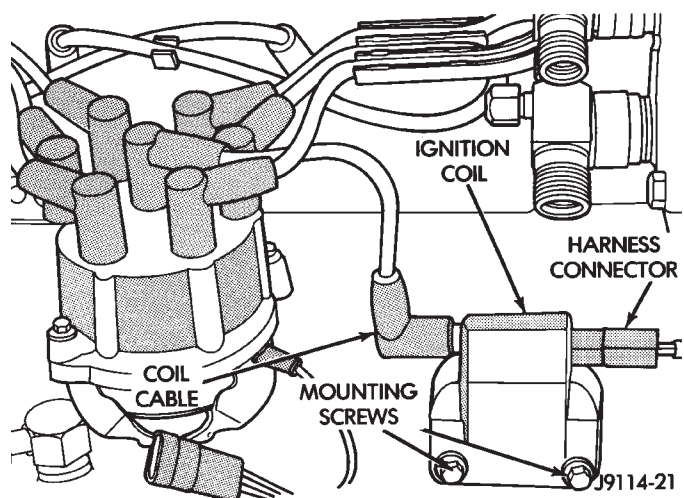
Ignition Coil—Typical (4.0L Shown)
